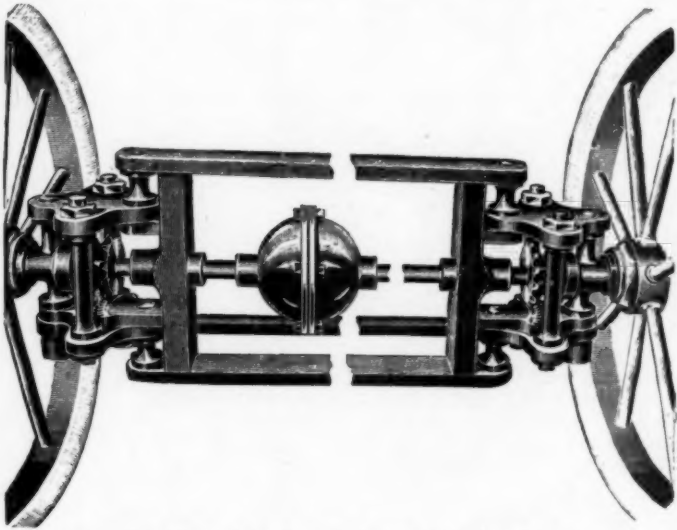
Perspective View of the Fore-Carriage with Driving and Steering Gear
